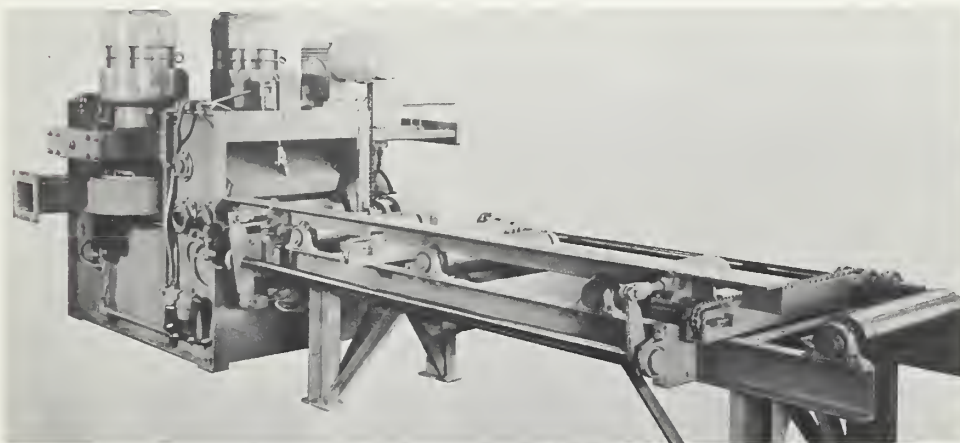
Two-head Chipmunk side chipping edger. One head is fixed; the other is hydraulically actuated (Stetson-Ross photo).
